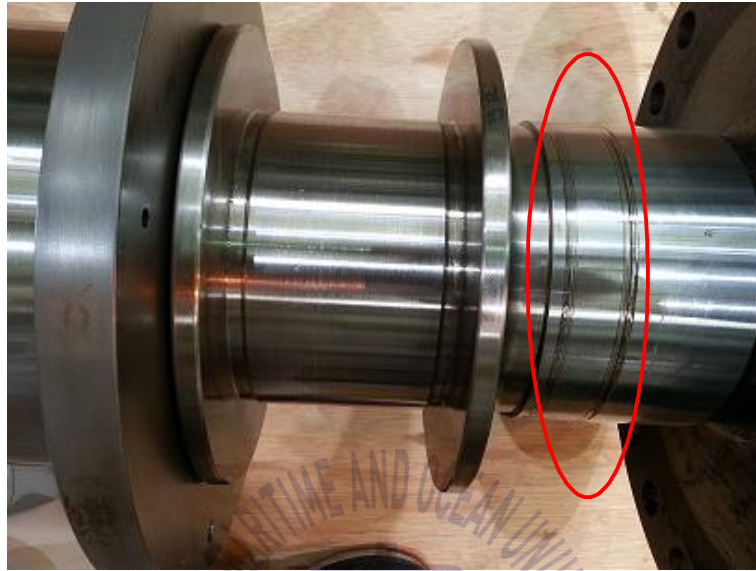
Damage of clutch shaft input shaft⁵⁾
